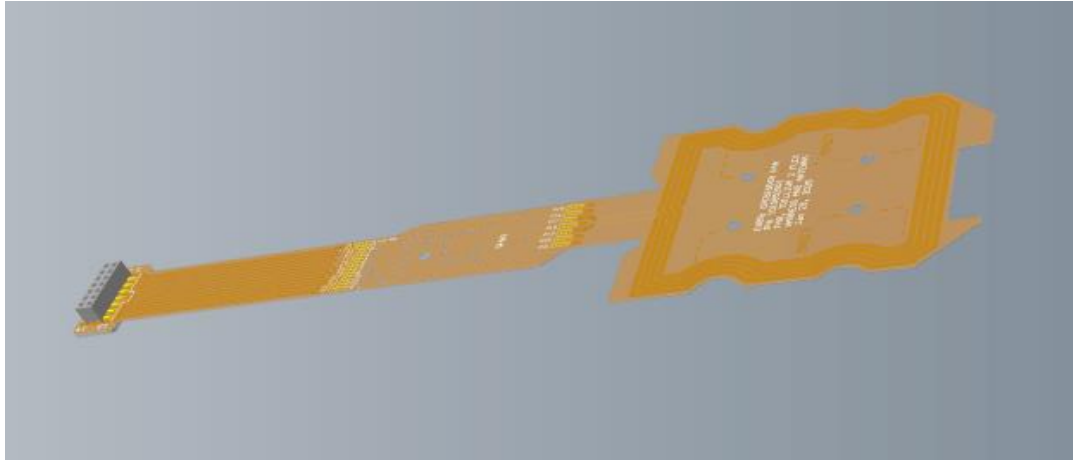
RFID Reader Antenna PCB electrical assembly with Connector
